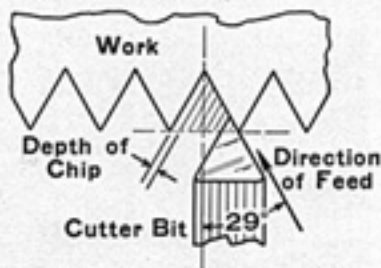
Action of thread cutting tool when compound rest is set at  $29^\circ$  angle.
